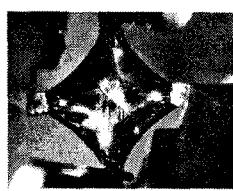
Prototype weld bead shapes of LB(spot) welding for lower side
